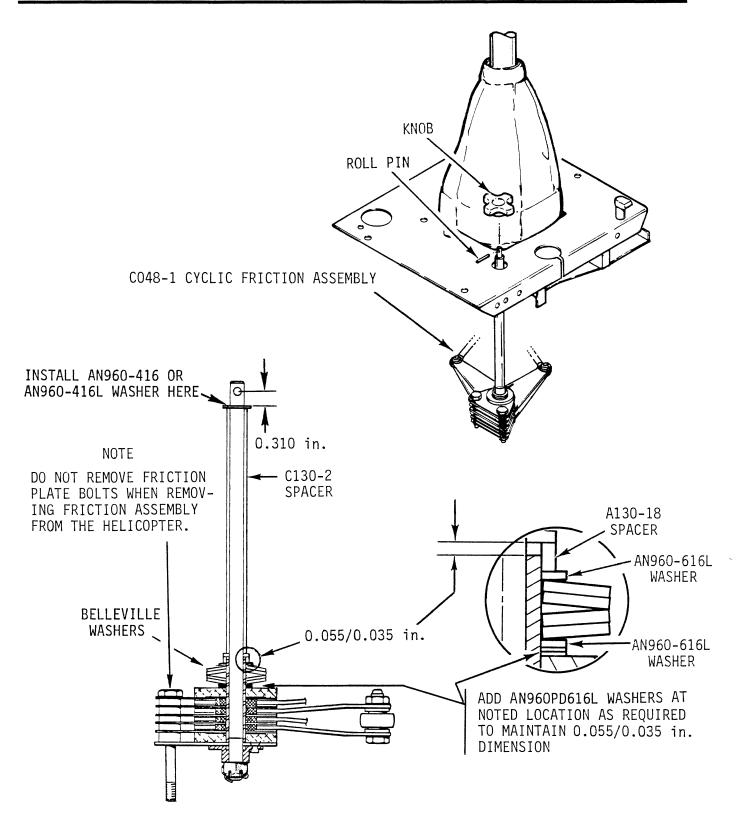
D CYCLIC FRICTION ASSEMBLY AND ADJUSTMENT
